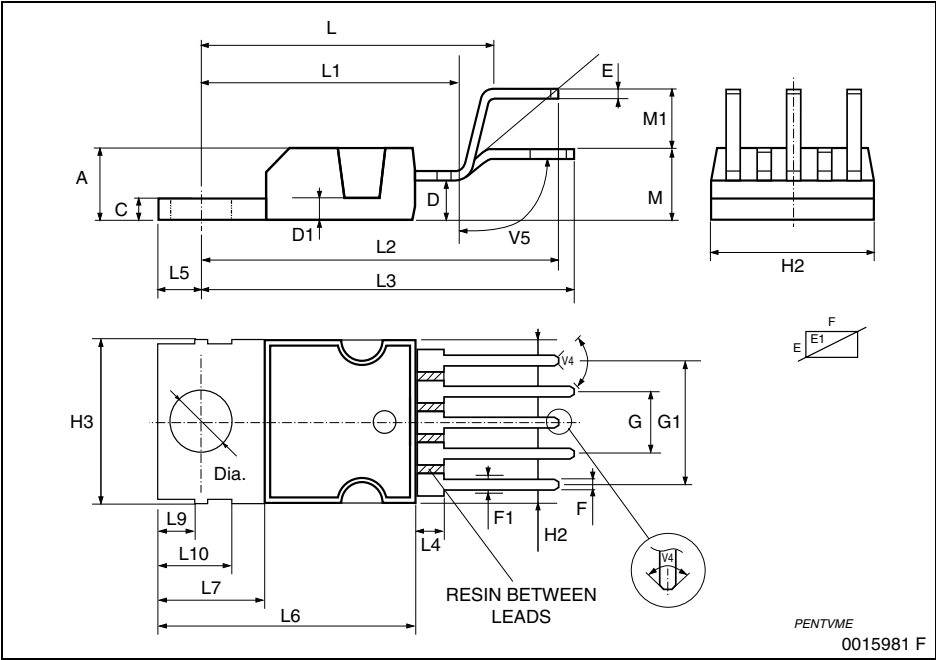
Pentawatt in Line Mechanical Data & Package Dimensions
